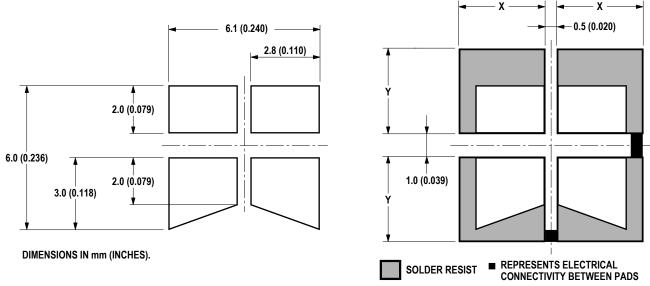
Recommended Soldering Pad Pattern (TTW).
